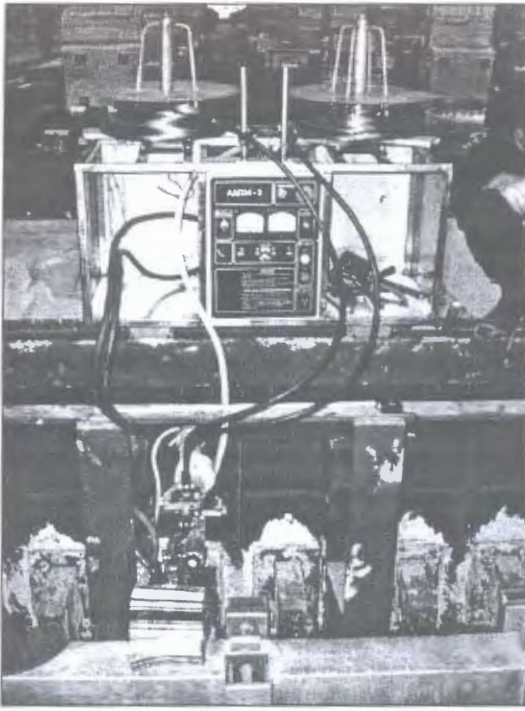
Machine ADPM-2 for welding of plate-blooms joint at electrolyzer installation
